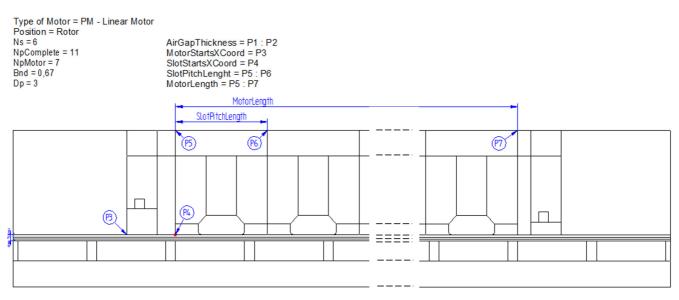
DXF-Import Linear Motor - Basic Parameter
